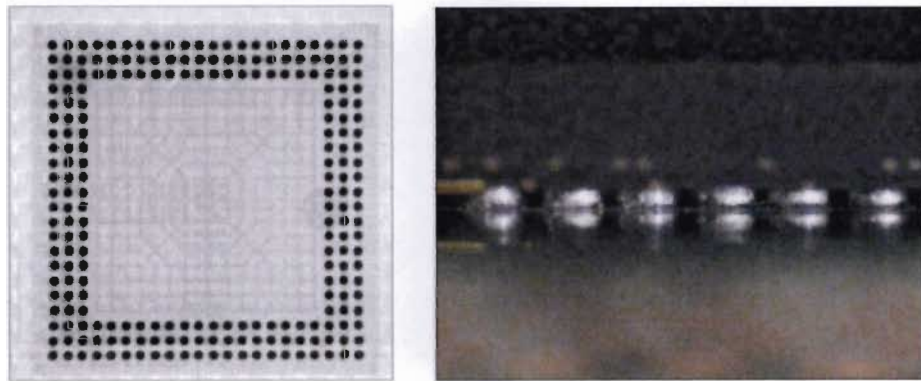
X-ray (left) and Microscope (right) images of CSP solder joints
